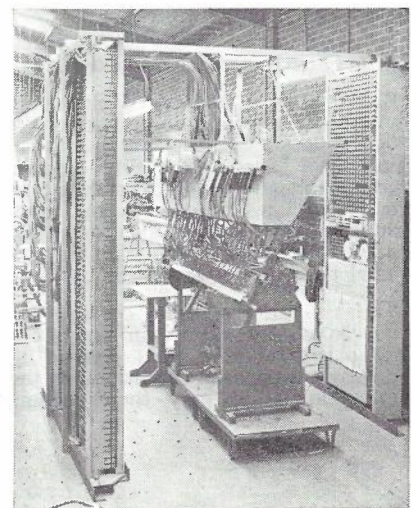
Automatic Test Equipment for the Final Inspection of Rack Wiring.
